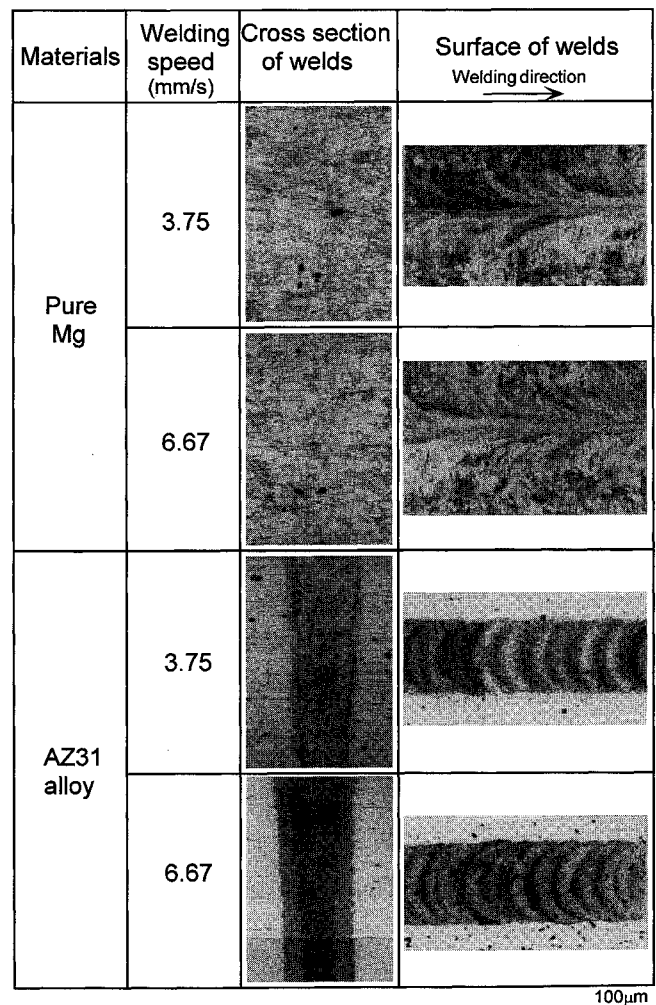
Macrostructures of electron beam welded joints.
